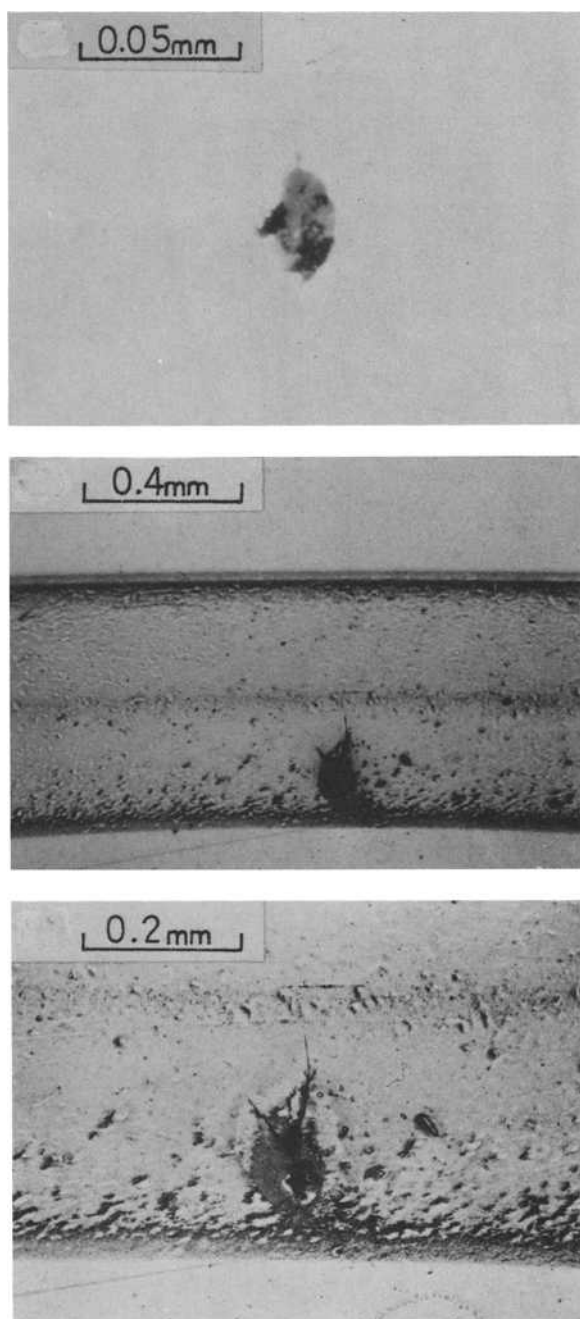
Platelike carbides directly under flaking on the rolling track: (top) oxide inclusion on the rolling track; (middle and bottom) cracks on the track.
